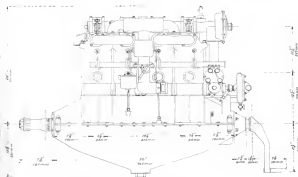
SIDE ELEVATION OF THE HALL-SCOTT TYPE A-7 ENGINE
